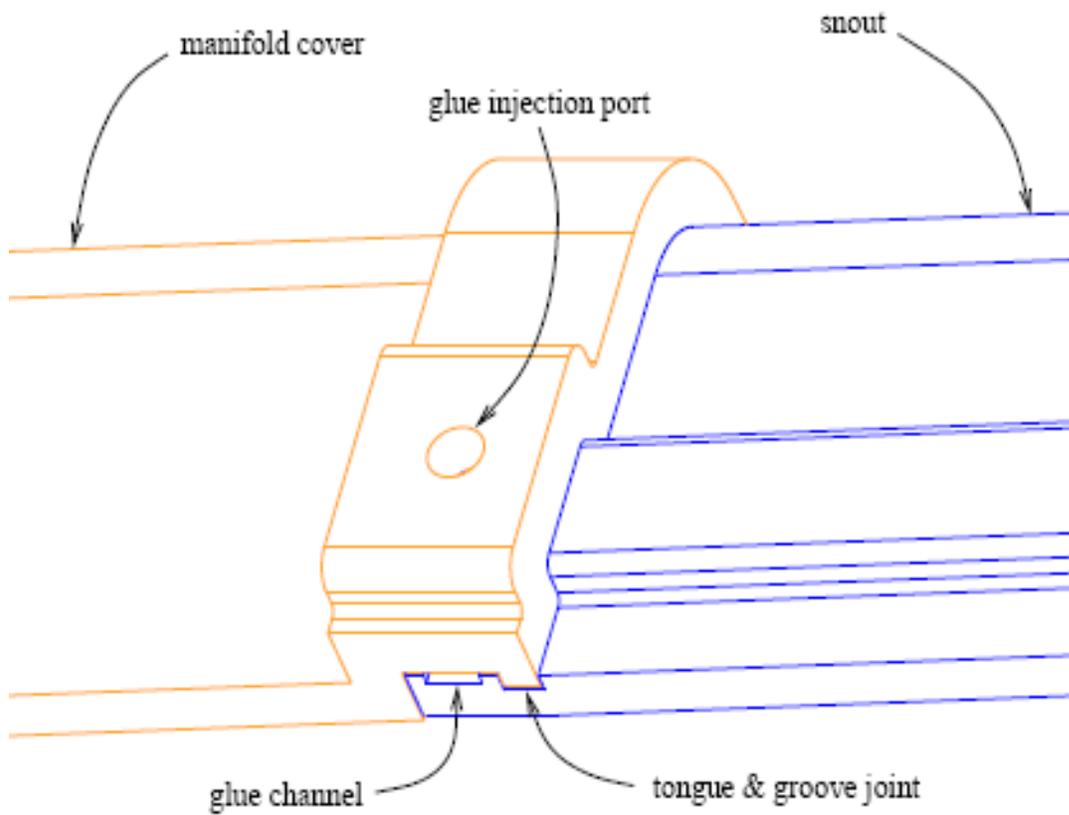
Close-up of glue joint between the snout and the manifold cover. The manifold cover is slipped over the snout and then glue is injected into the tongue and groove joint.
